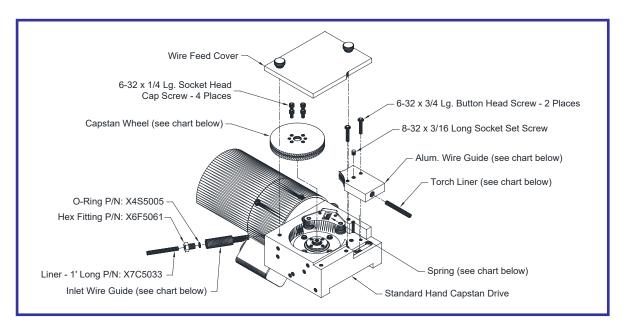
Aluminum Pick-up Block Standard Hand Wire Drive Configuration
